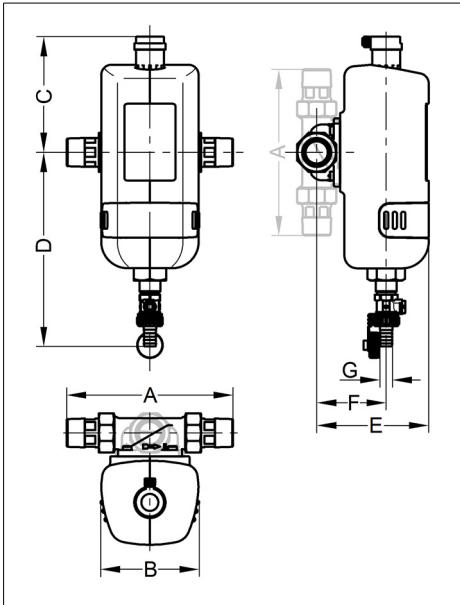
Installation dimensions JMFI 3/4" - 1 1/4"
